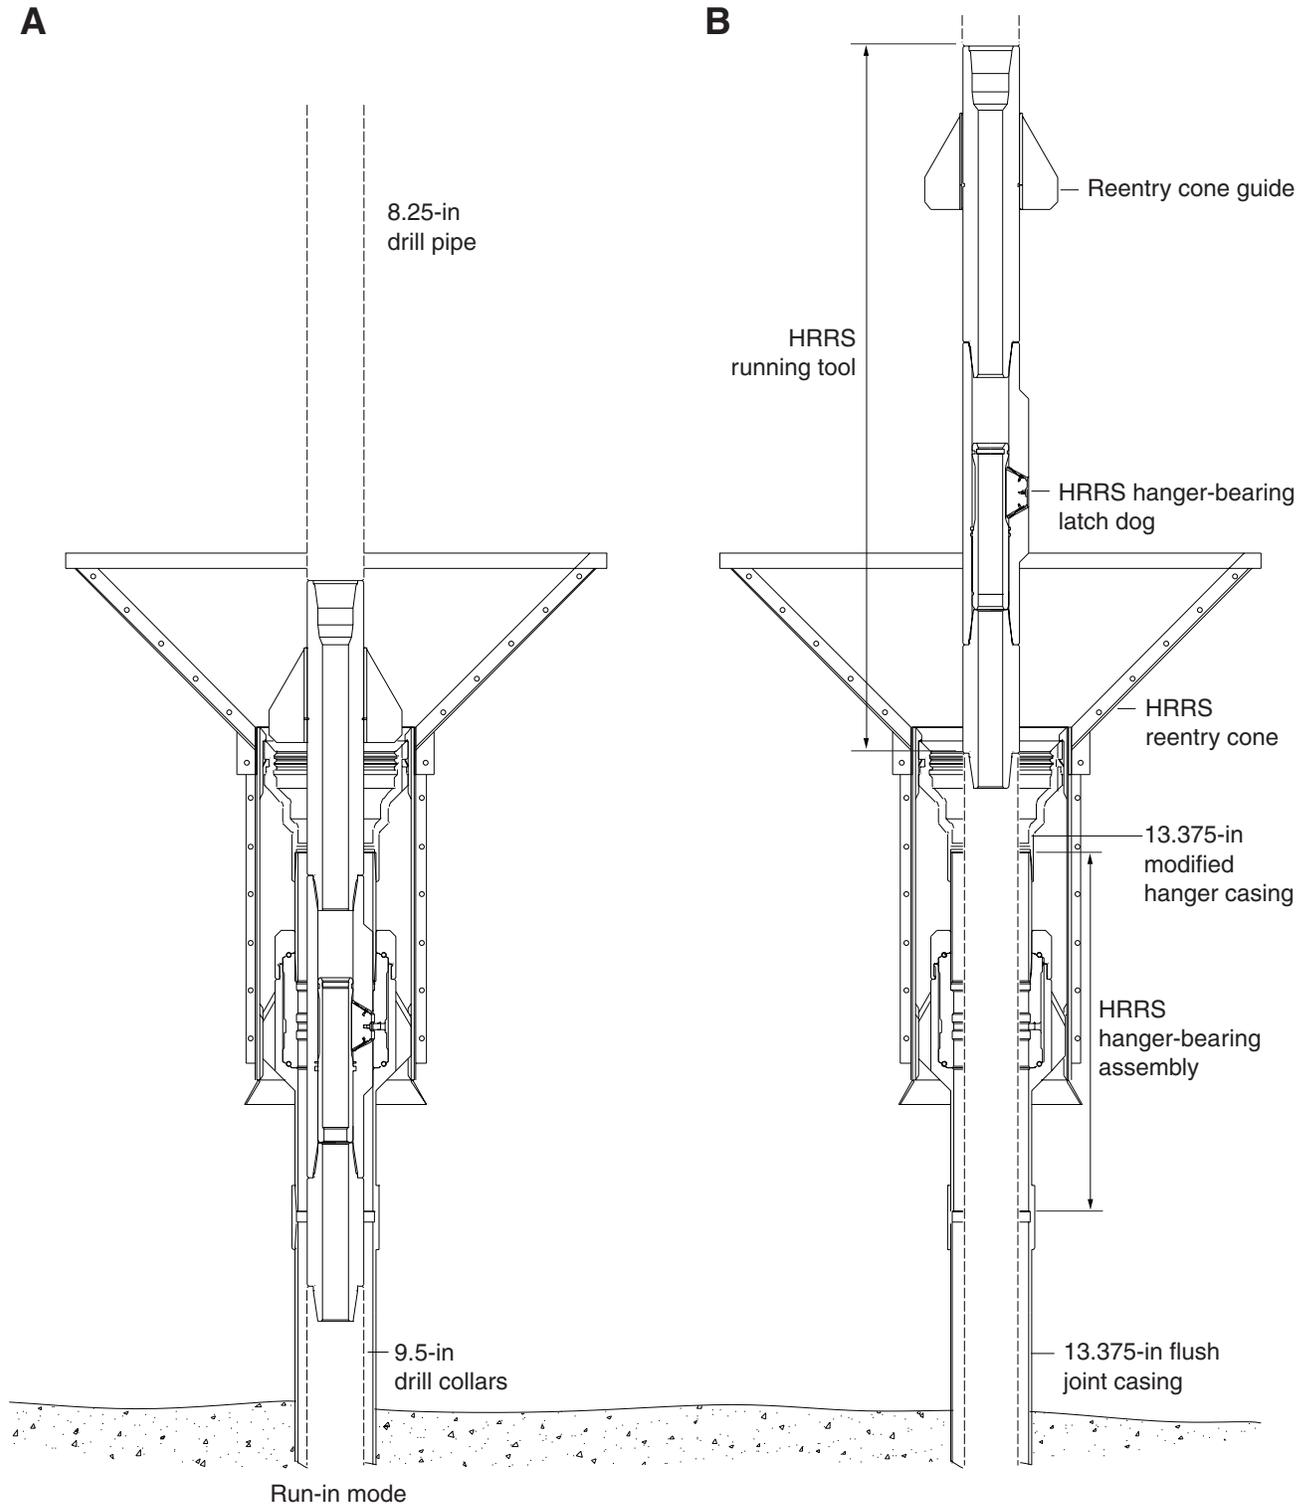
Hard-rock reentry system setup. NC-70 connections are cut on 9.5-in bodies. FHM = full hole modified, CADA = cam actuated drilling assembly.
